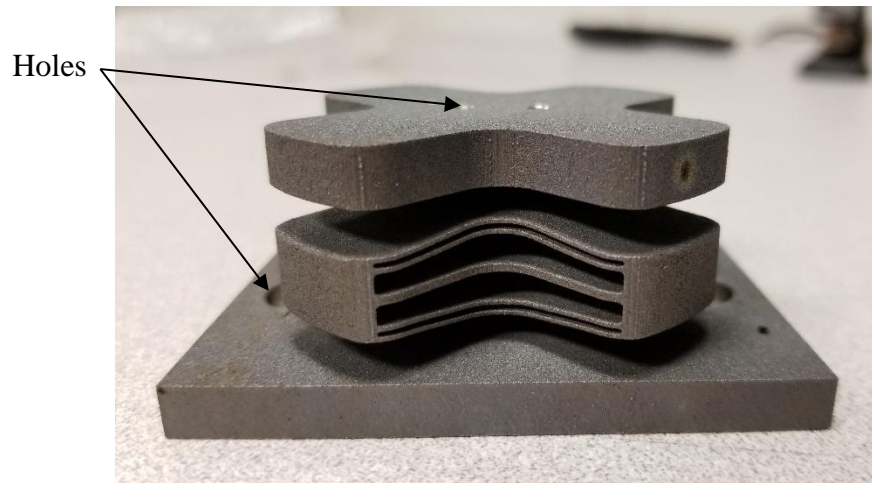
Metal conformal honeycomb prototype with accelerometer and drop-table mounting holes
